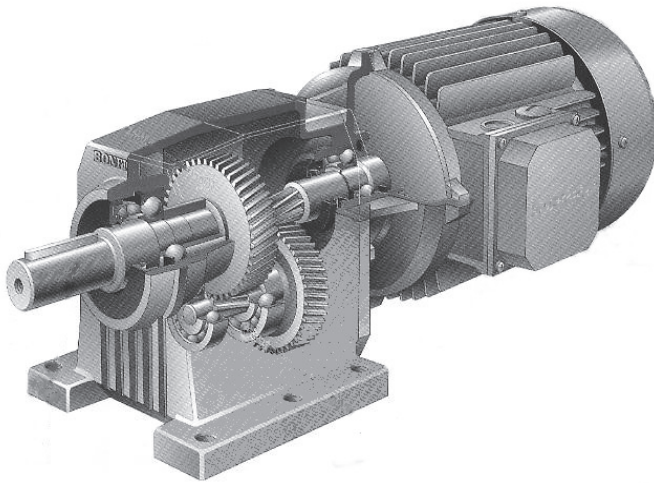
Engineering example of the modern motoreducer Fig. 2. Kinematical scheme of the considered gear reducer
